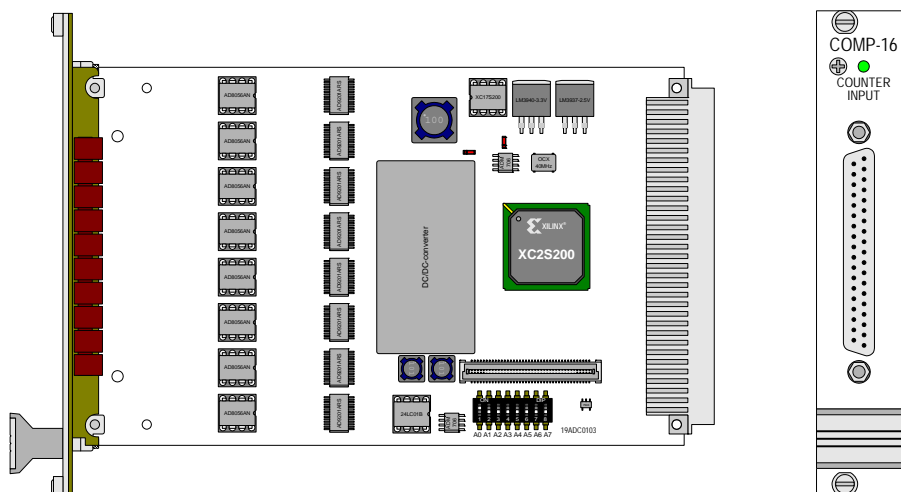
Pro-Comp-16 REVA: Printed circuit board and front panel
